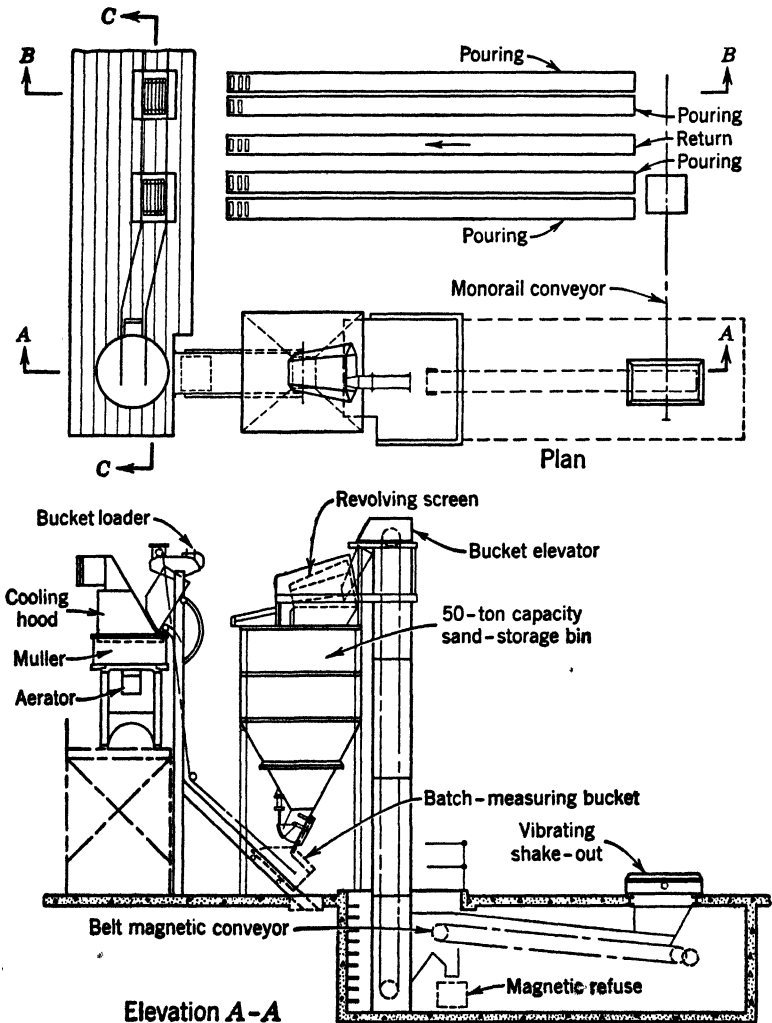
Typical layout for a light jobbing foundry. (Courtesy of National Engineering Co., Chicago, Ill.)
